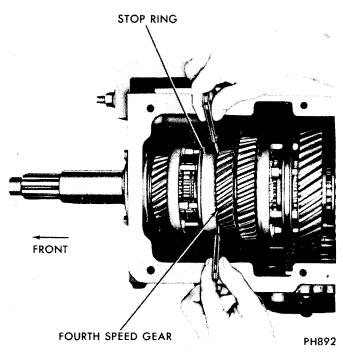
Checking Synchronizer to Fourth Speed Gear Clearance
